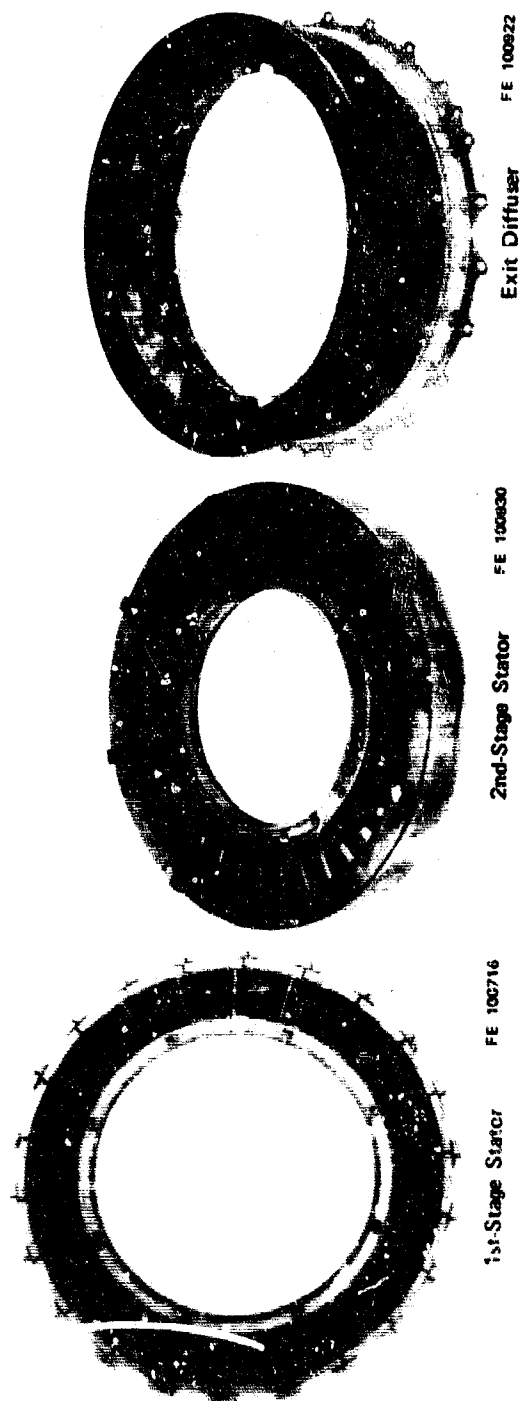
Disassembly View of Fuel Turbine Stators and Exit Diffuser Showing the Excellent Condition
